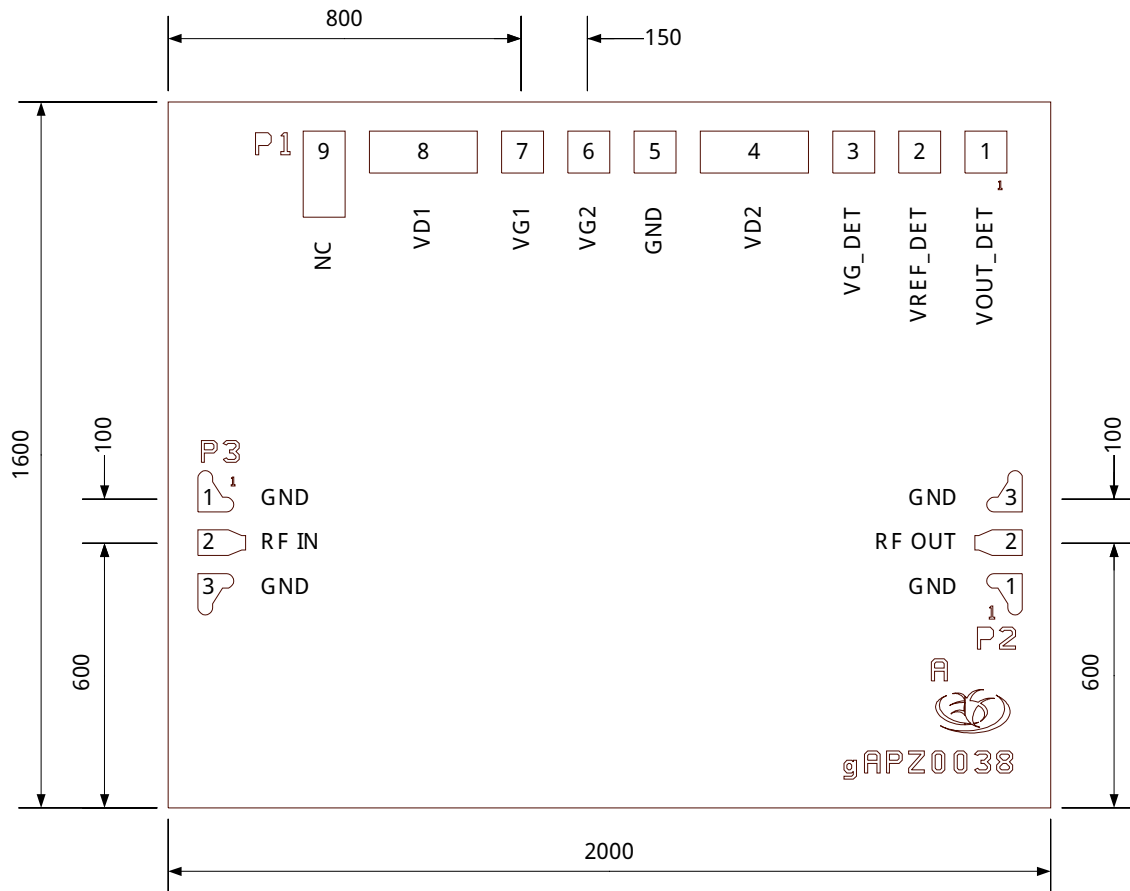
Outline drawing of the MMIC. Dimensions are in μm .
